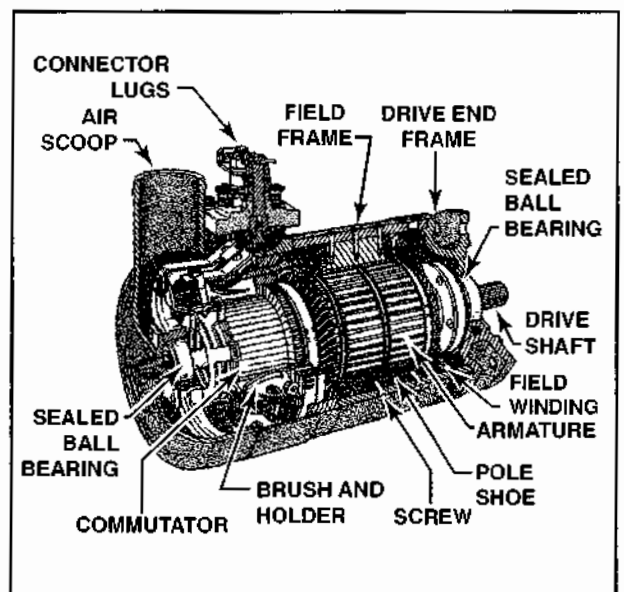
The major parts, or assemblies, of a DC generator include the field frame, rotating armature, commutator, and brush assembly.
